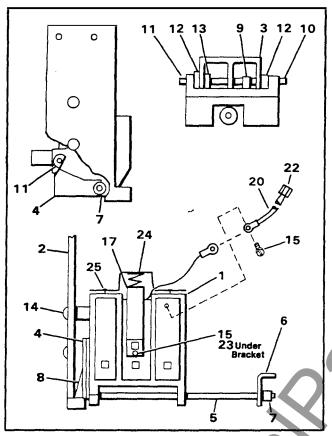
Blown Fuse Trip Assembly 18-399-805-501
